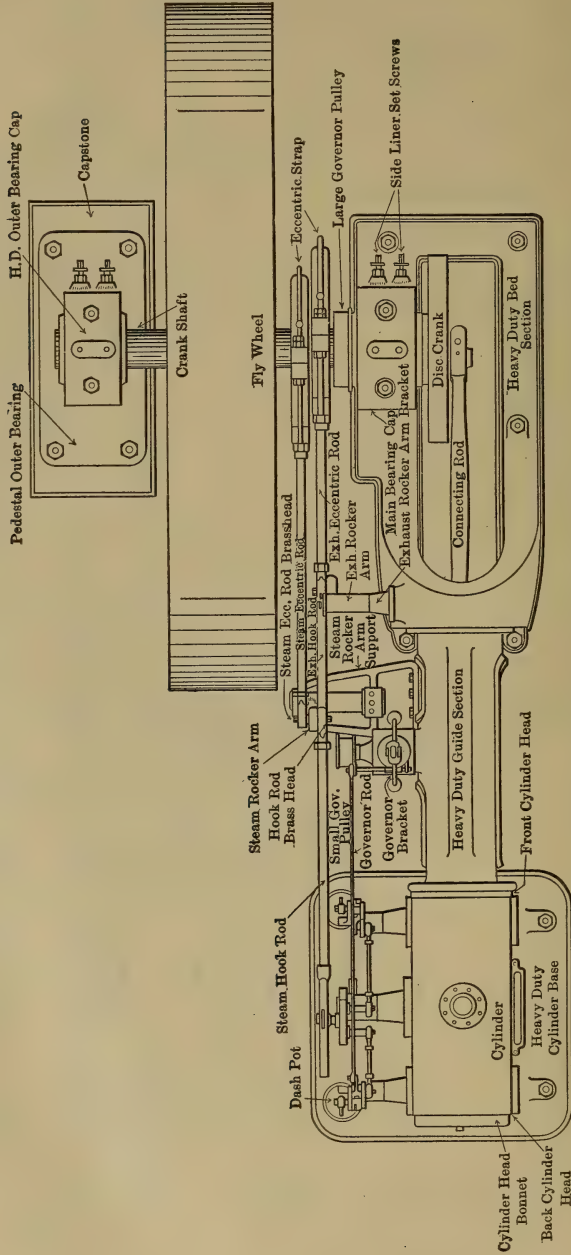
Plan View of a Typical Cortiss Engine, Single Cylinder, Belt Drive.
